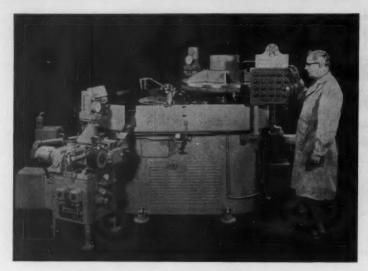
Gear-blank end faces are honed flat and parallel on "Microflat" honing machines
